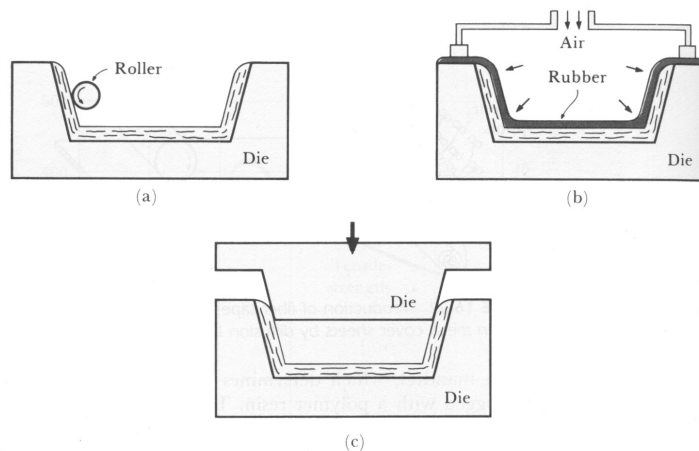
Producing composite shapes in dies by (a) hand lay-up, (b) pressure bag molding, and (c) matched die molding.
